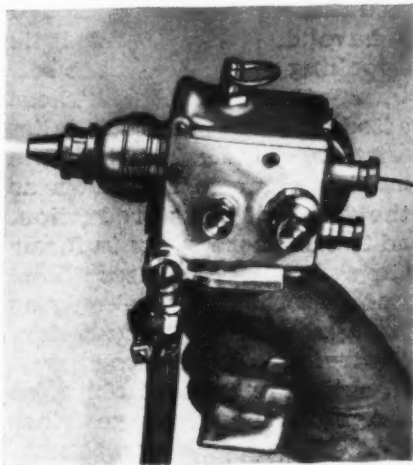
Typical metal spray gun employed in a relatively new process which is capable of providing a protective coating of one type of metal on a dissimilar material. Building up of machine parts is another field in which the process holds many possibilities
